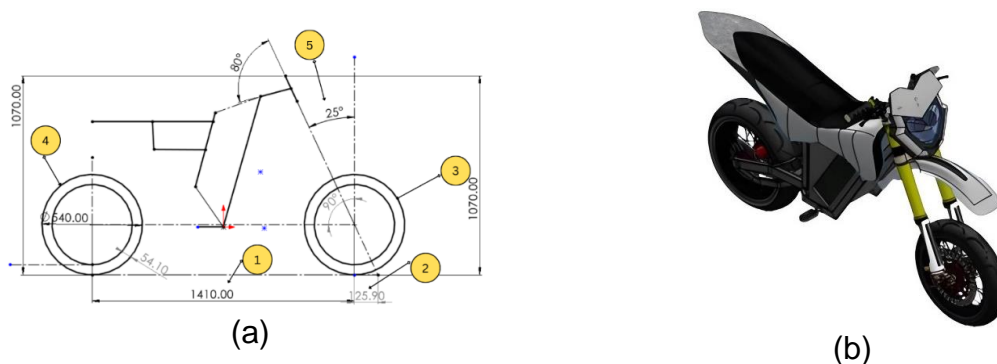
(a) ELGO motorbike frame dimensions and (b) Design of ELGO electric motorcycle
